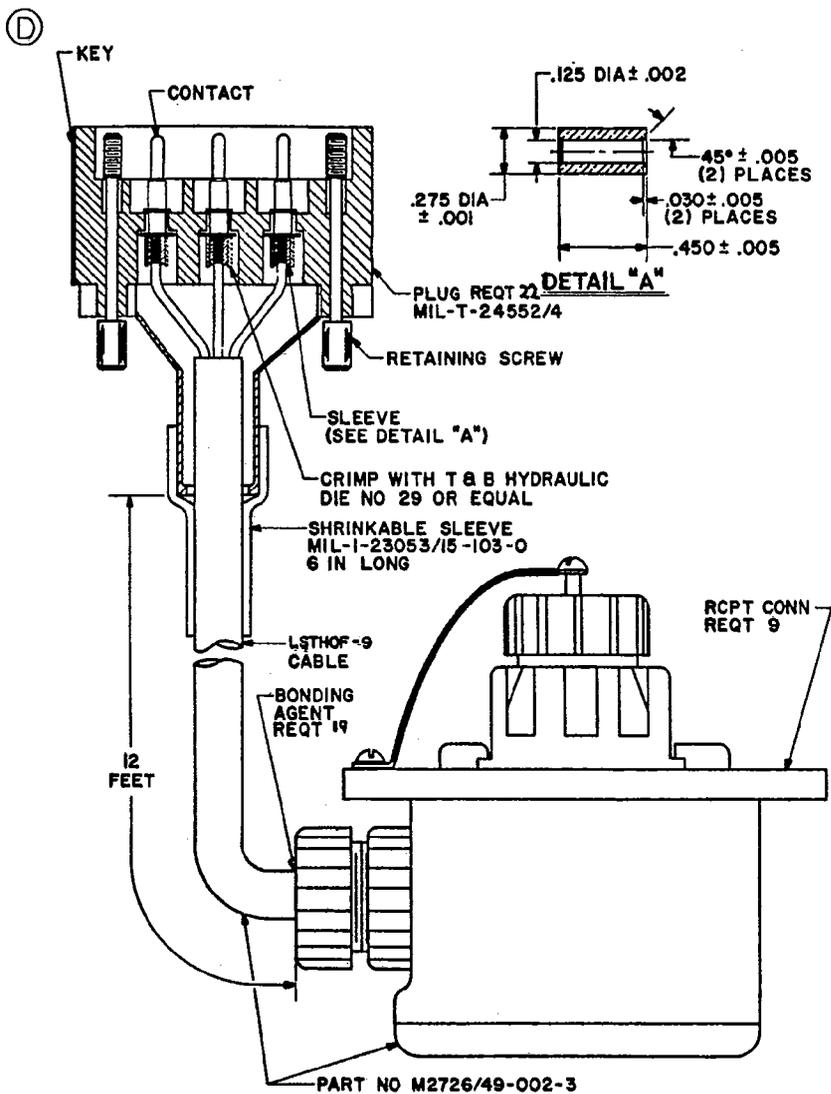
Dimensions and configurations for part number M2726/49-002-1.
